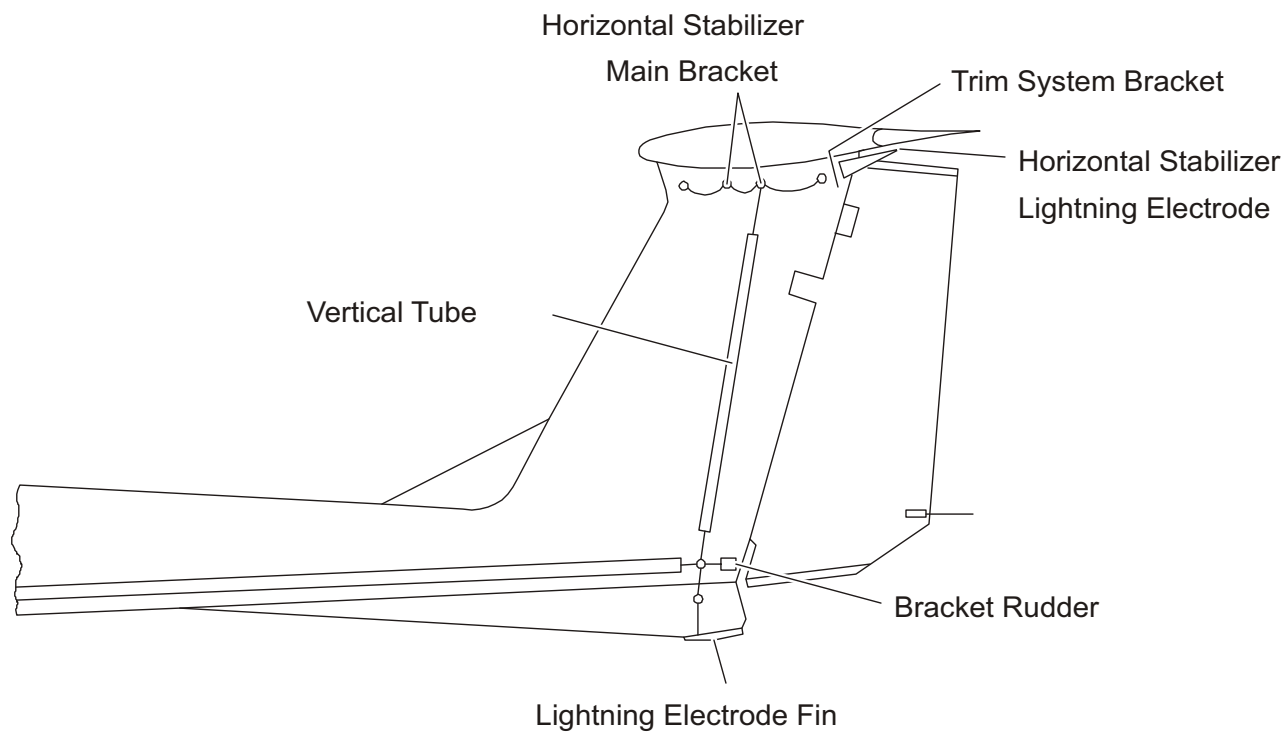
Airplane Lightning Protection and Bonding System Schematic (Sheet 3)
